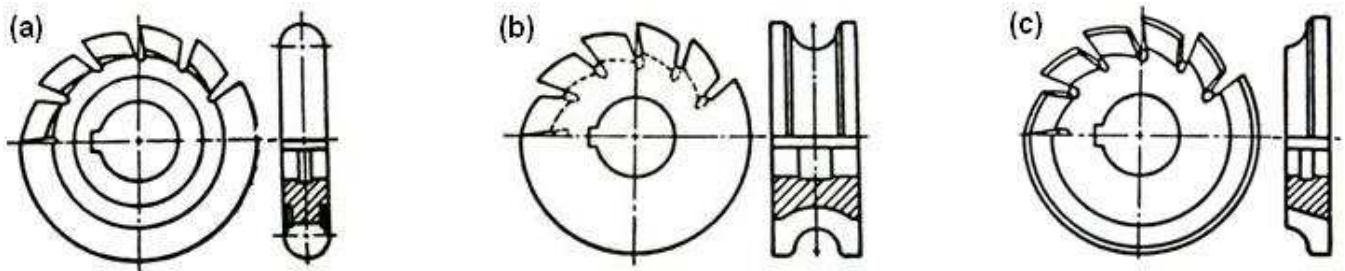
(a) Convex milling cutter (b) Concave milling cutter and (c) Corner rounding milling cutter
